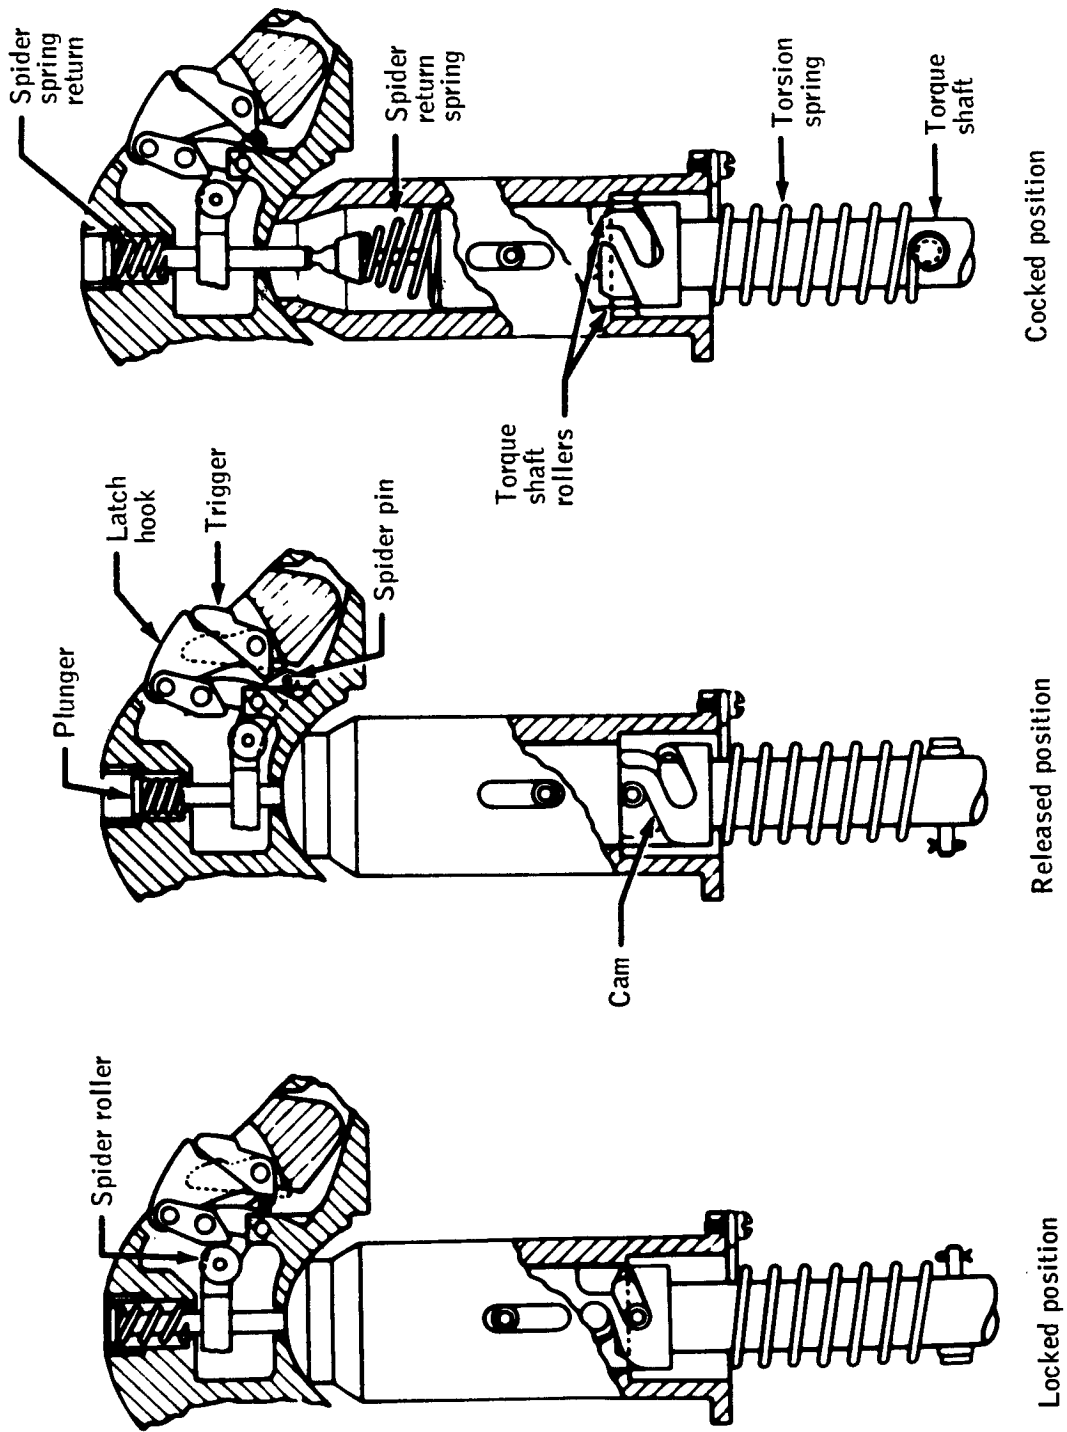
Relationship of probe latch and cam mechanism.
